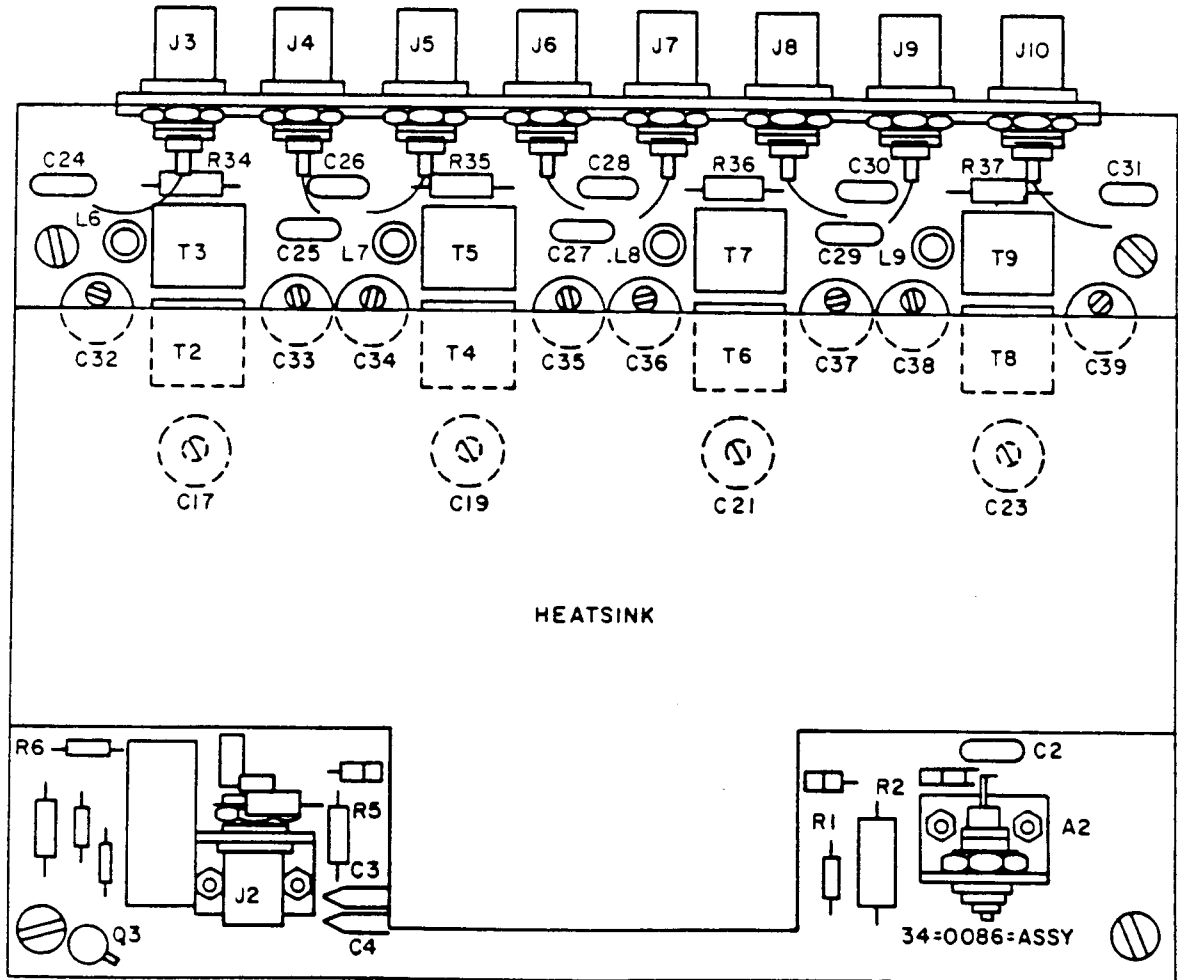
Divider Assembly 1A2, Location of Adjustments.
